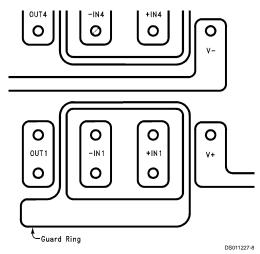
Example of Guard Ring in P.C. Board Layout, Using the LPC660
